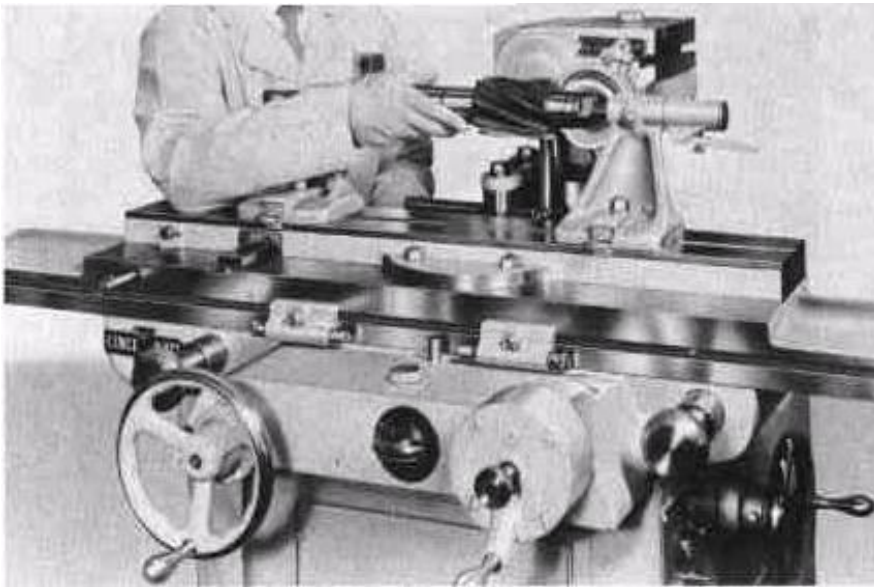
Grinding a plain milling cutter on a tool and cutter grinder.
